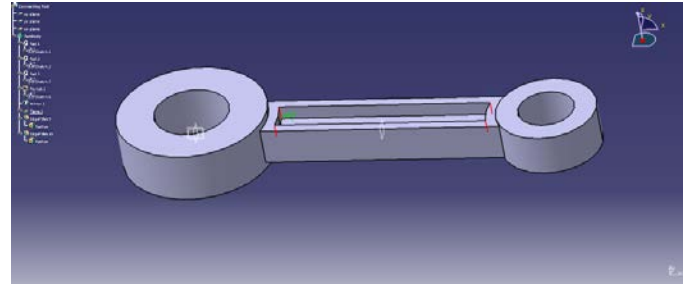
Edge Fillet Sketch (Radius =4.8mm)
